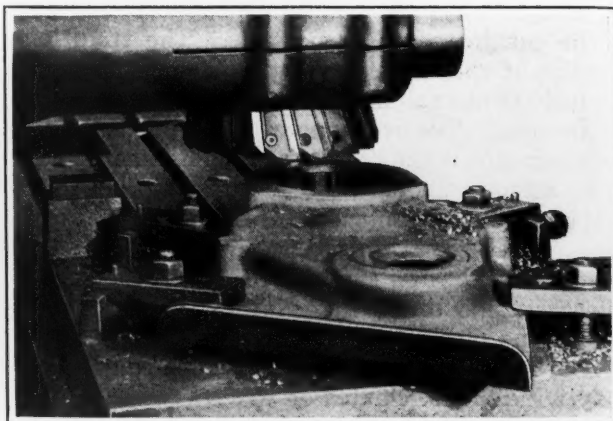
Milling Cast-iron Chain Covers with a Feed of 26 Inches per Minute
